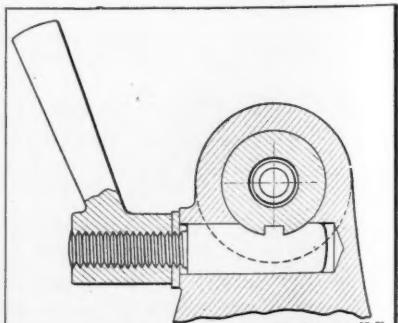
Clamping Bolt for Poppet or Tailstock Spindle
